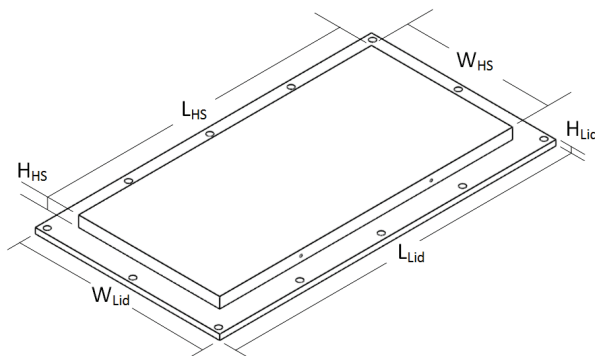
Aluminum lid piece that is bolted to the aluminum bottom tray. The Southeastern Thermal Systems 40W heater is adhered to the top surface.
